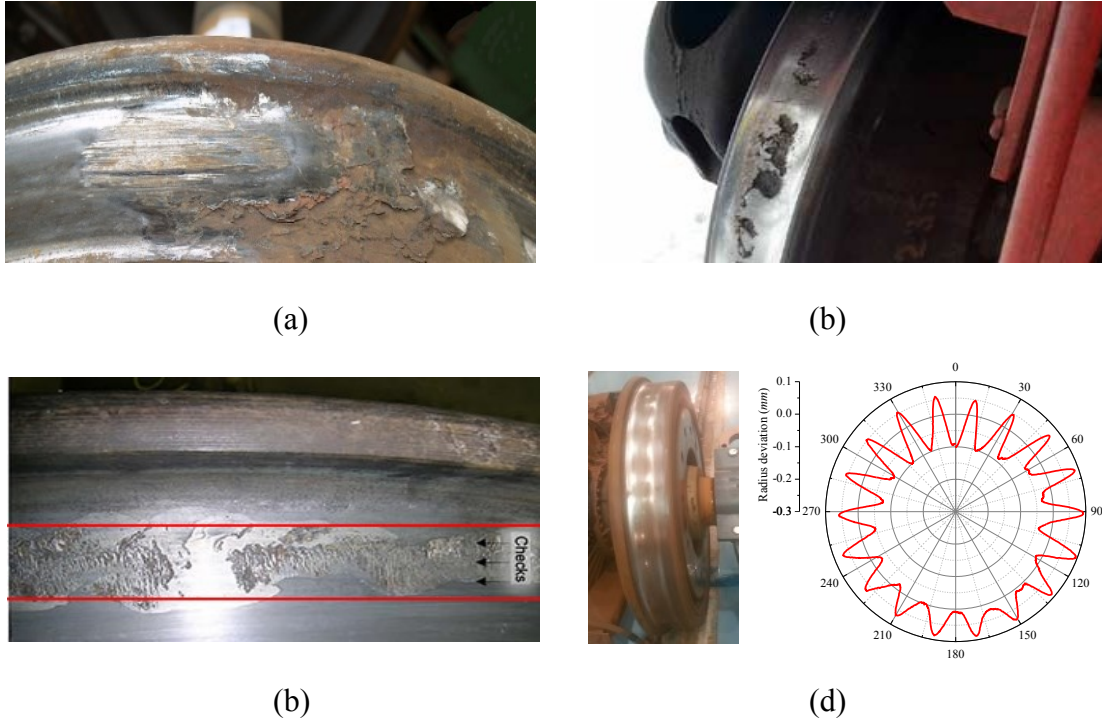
Examples of wheel defects: (a) wheel flat; (b) wheel spalling; (c) wheel shelling; and (d) wheel polygonalization.
